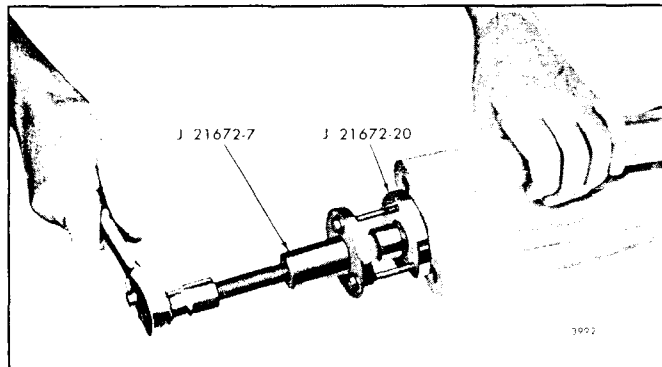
Removing Oil Seal Sleeve and Roller Bearing Inner Race from Rotor Shaft
